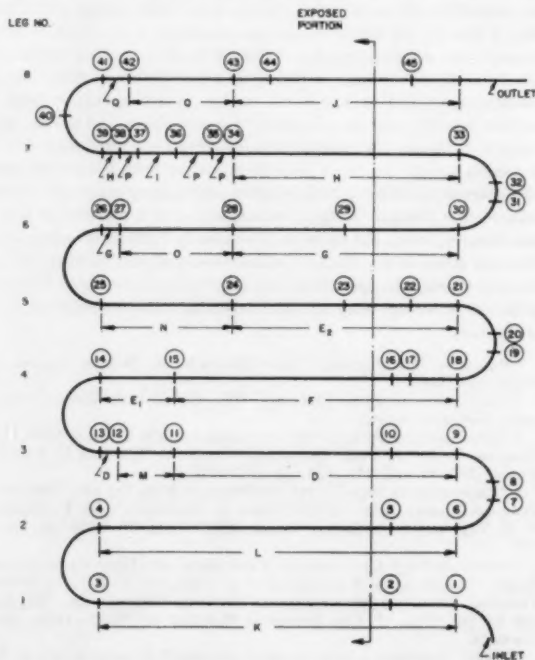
FINAL ARRANGEMENT OF TEST ELEMENT SHOWING LOCATION OF MATERIALS AND WELDS
